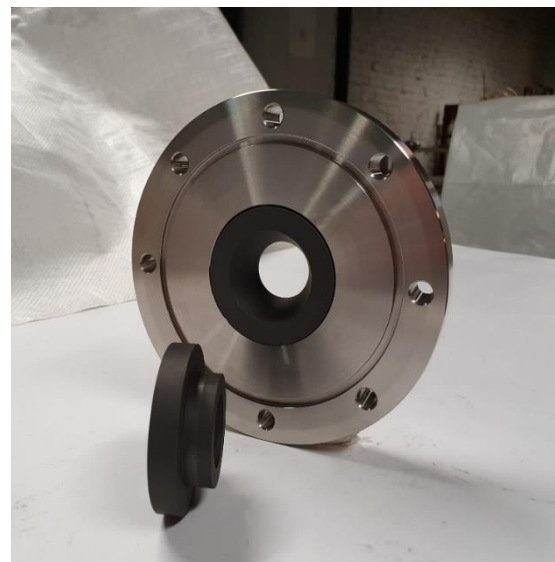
Picture of Nozzle and Nozzle Plate assembly.
